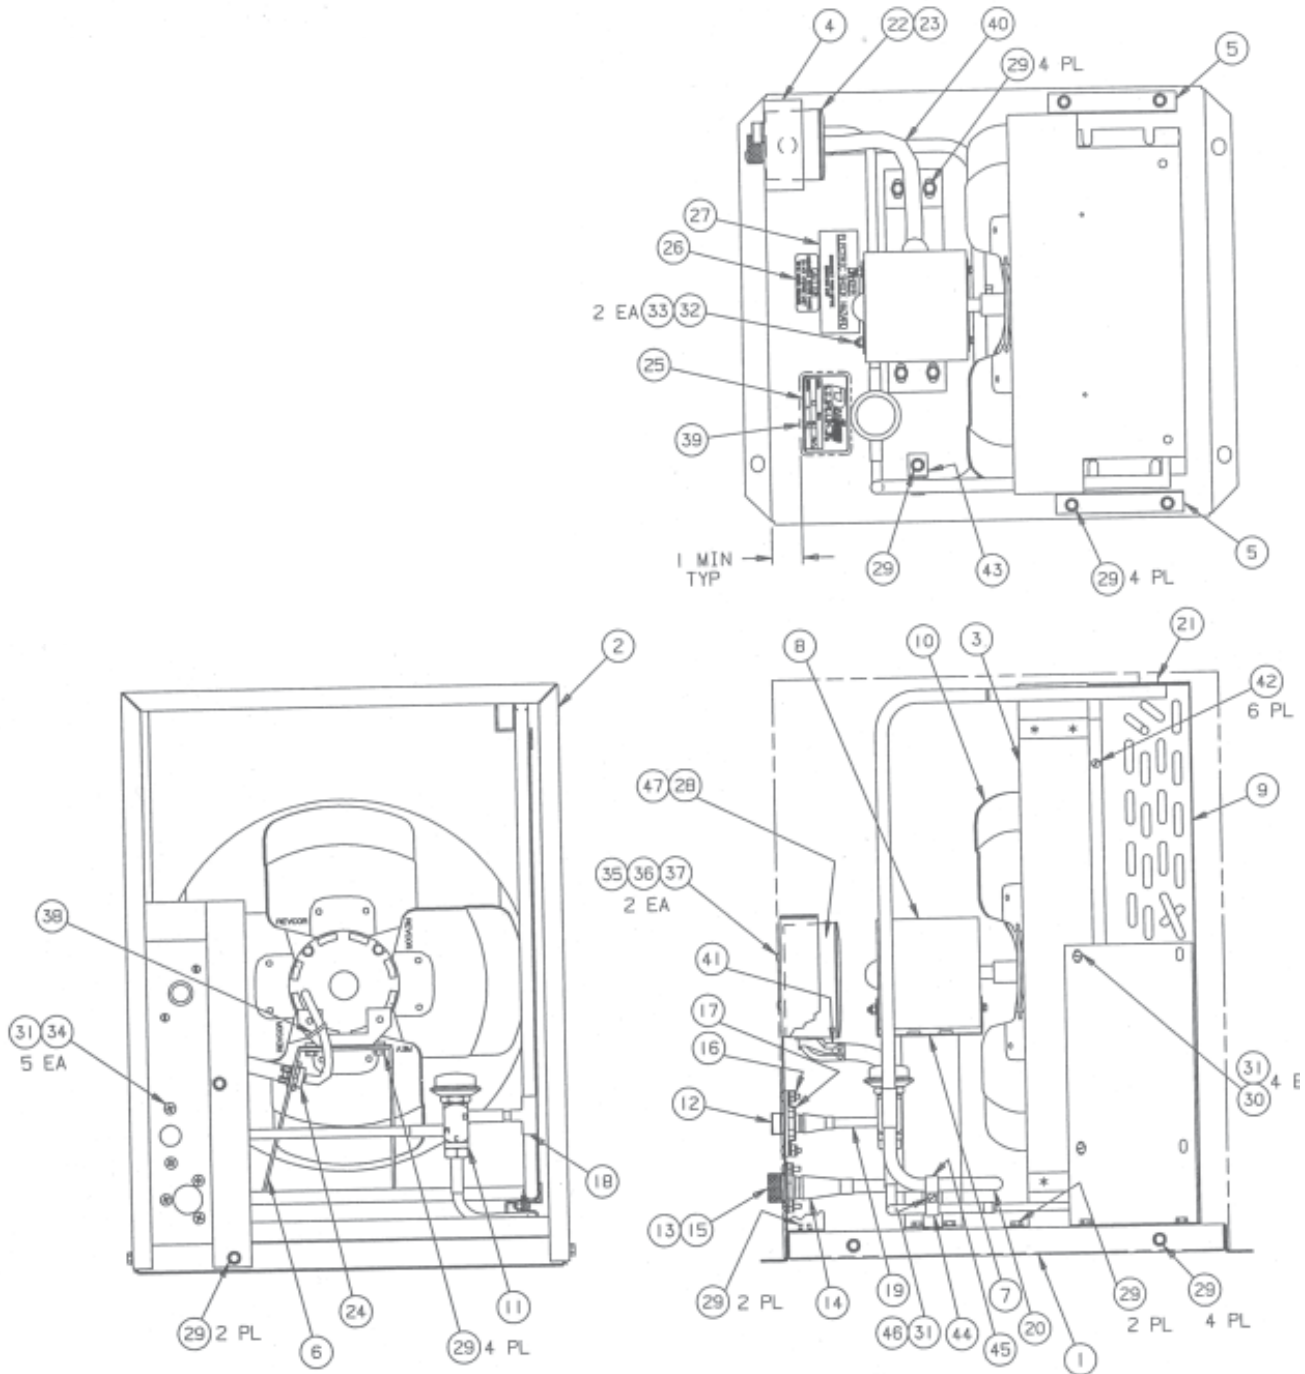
Air Cooled Remote Condenser Assembly (Page 2 of 2)
